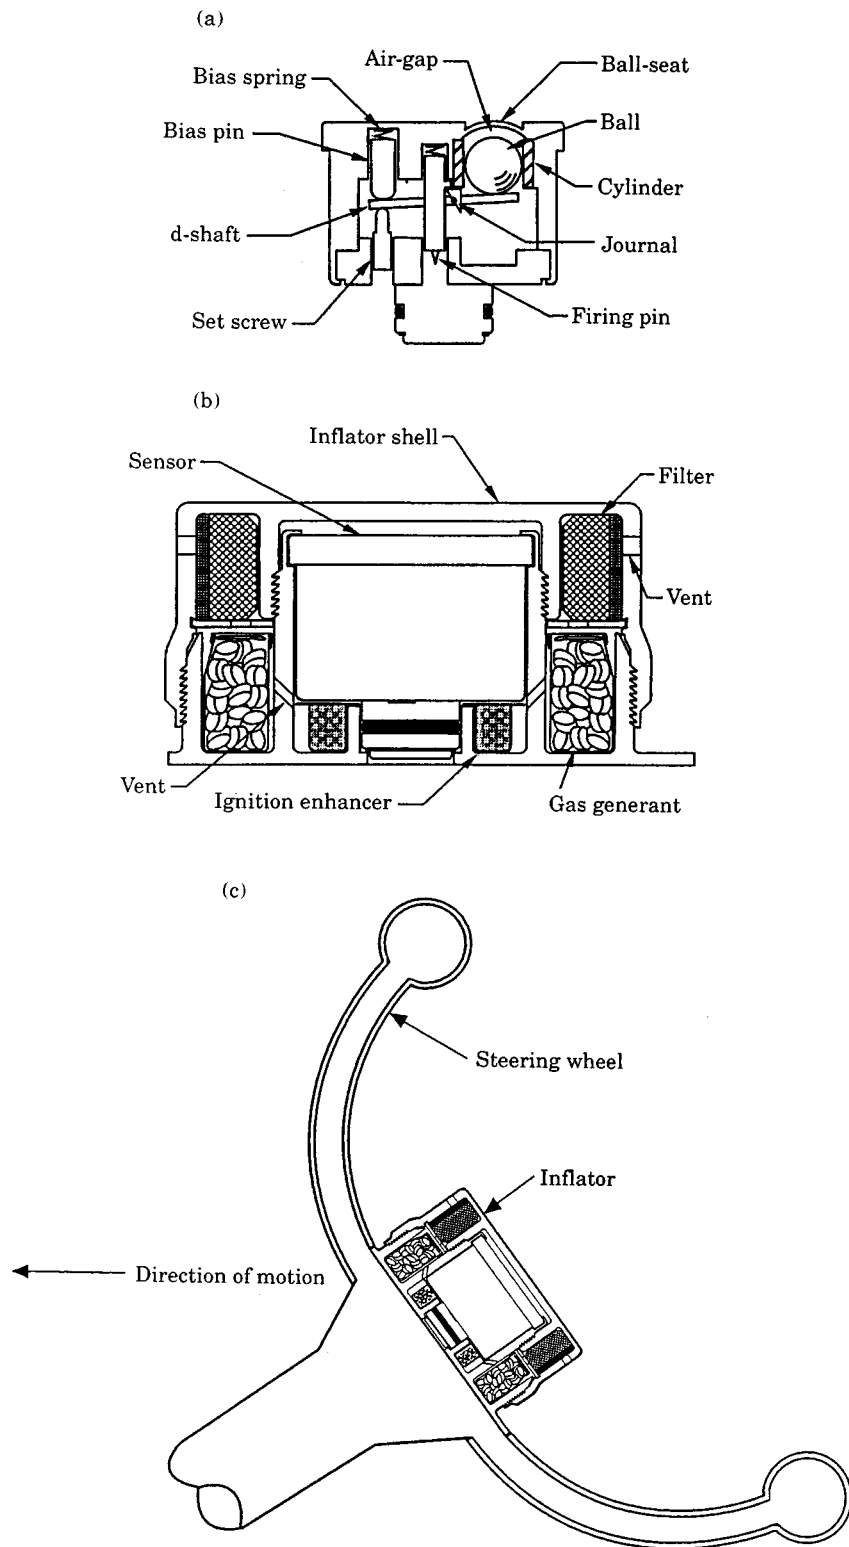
Typical all-mechanical ball-in-tube airbag system sensor: (a) cross-section of sensor, (b) inflator shell with sensor, and (c) steering wheel with an inflator and sensor.
